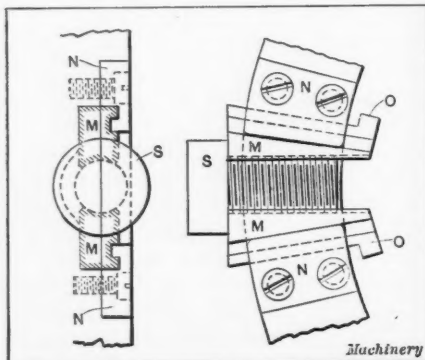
Enlarged View of Jaws of the Clamping Mechanism shown in Fig. 1
